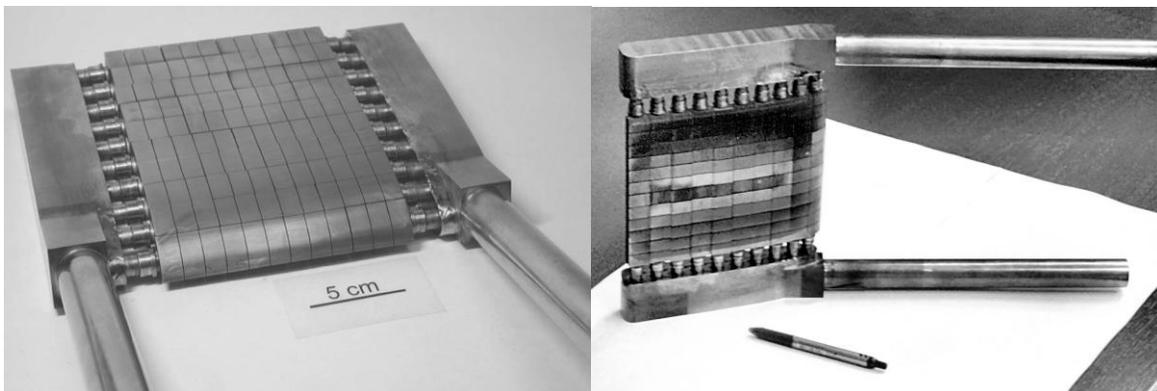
Target prototype final assembly (left) and surface visual inspection after the first electron beam power test performed at the HHF facility (right).
